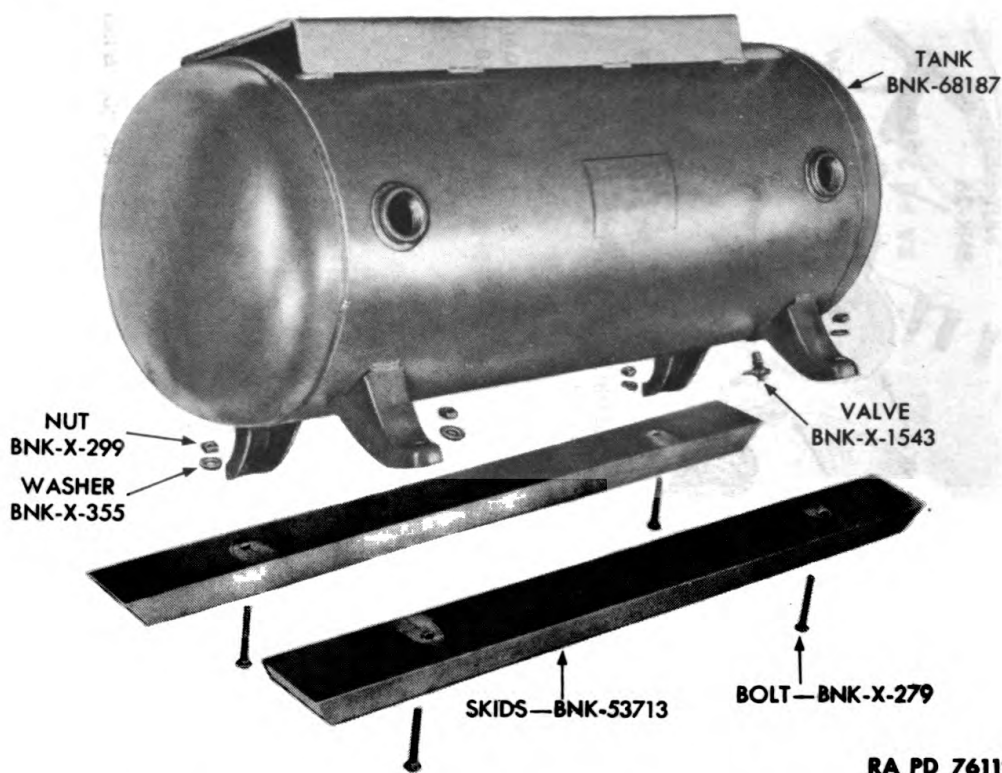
Air Compressor Tank — Skids and Drain Valve Removed
